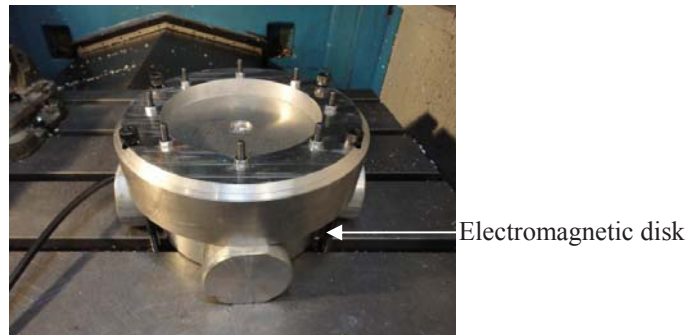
Placing the electromagnetic disk and the pad on the machining center.
